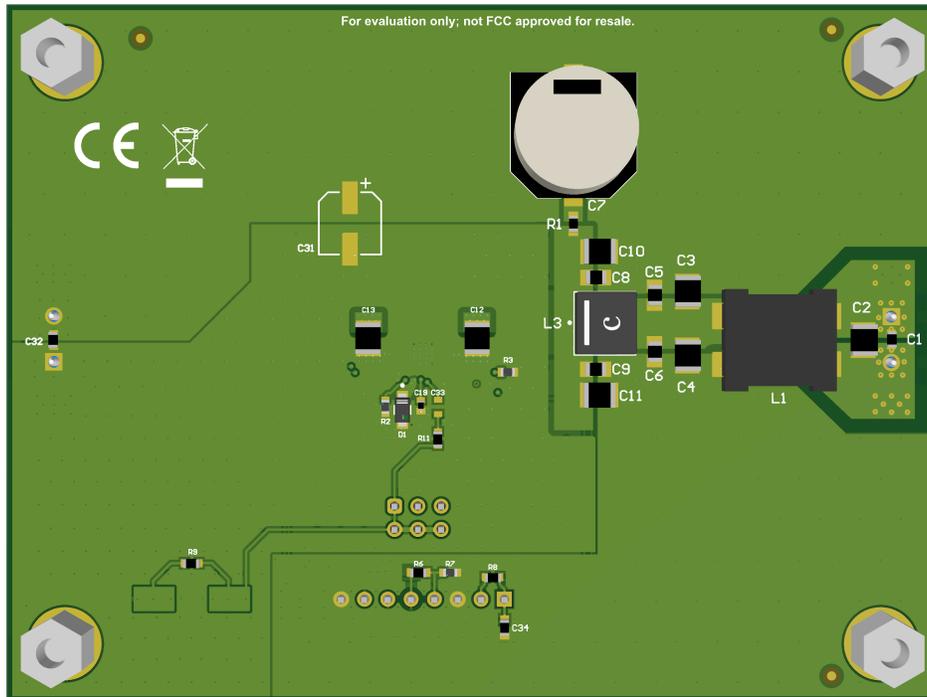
Bottom 3D View (Viewed from Bottom)
